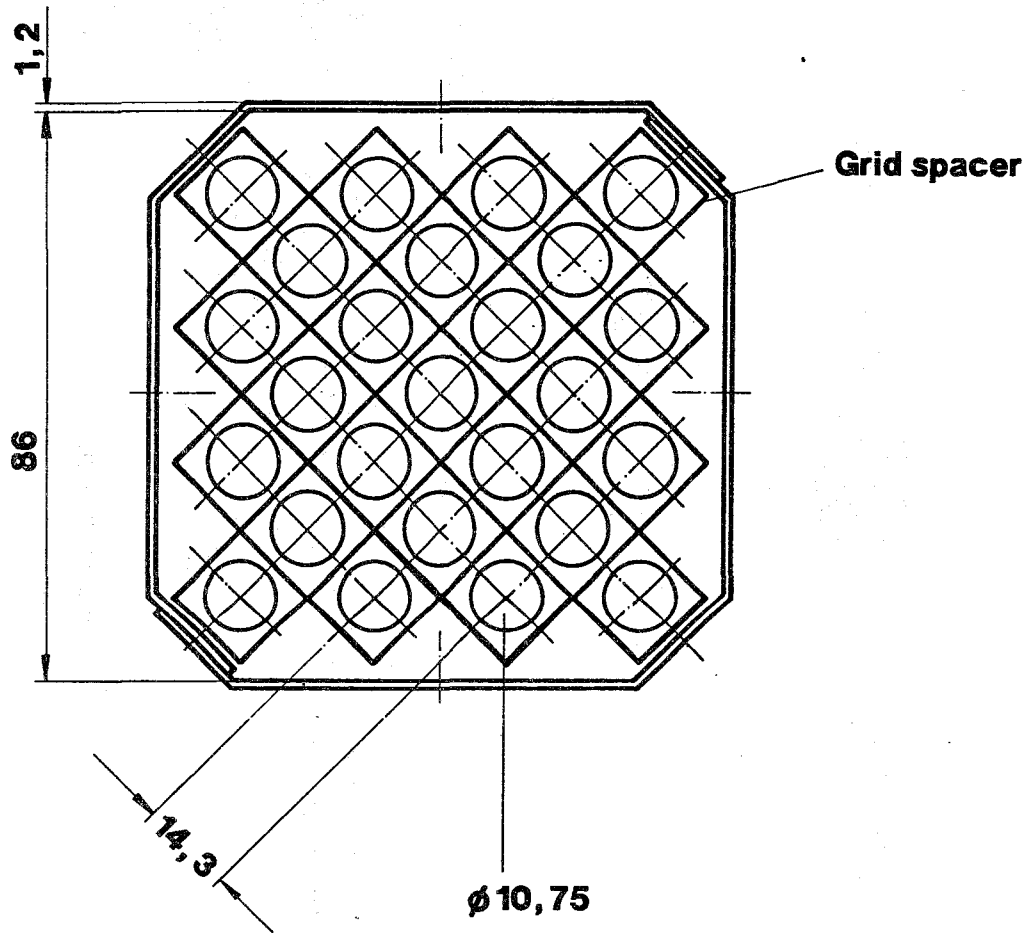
Cross section of the CORA bundle with shroud and grid spacer
